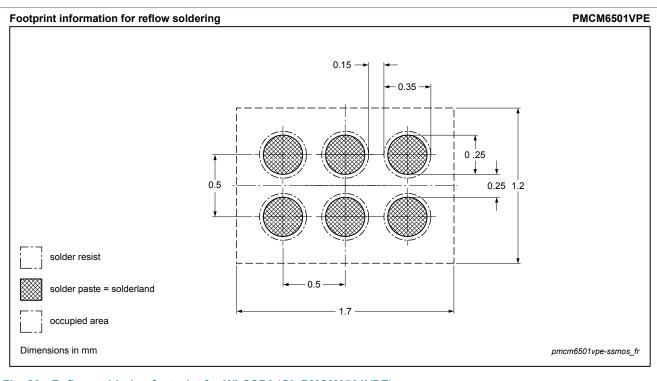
Reflow soldering footprint for WLCSP6 (OL-PMCM6501VPE)
